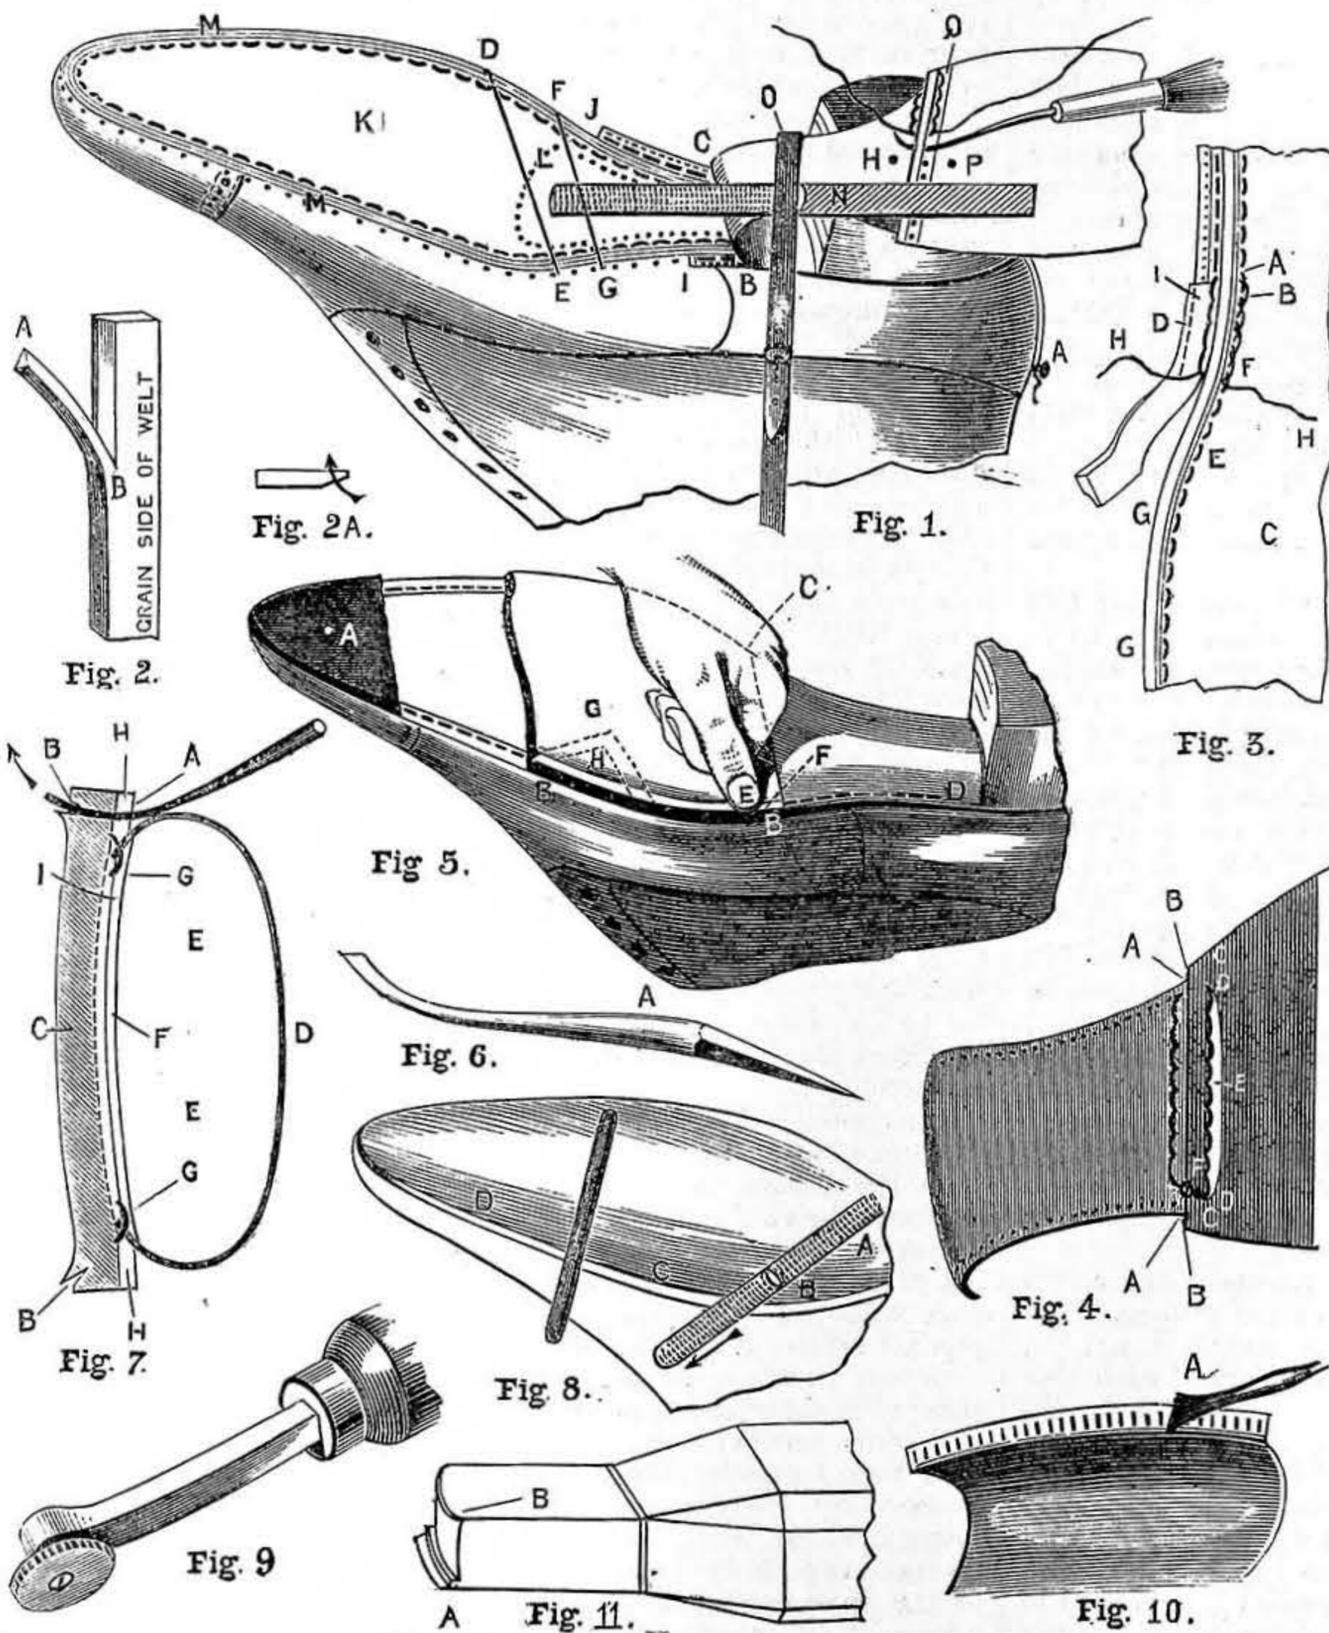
Boot showing Sole and Welt off and Waist turned back ready for Grafting, and Position to hold it while doing so. Fig. 2.—The Welt, with Piece nearly taken off to prepare for Sewing. Fig. 2 A.—Amount of Welt taken up in Sewing. Fig. 3.—Section of Boot, showing how to Sew Welt in. Fig. 4.—How to Sew Graft. Fig. 5.—Showing how to Fit, Stitch, Sew, etc. Fig. 6.—Blade of Stitching-awl. Fig. 7.—Transverse Section of Boot, showing Interior and Action of Awl in Stitching (A); B B, Channel; C, Sole; D, Upper Leathers; E E, Interior; F, Insole or Welt Stitch; H H, Welt; I, Bottom Filling. Fig. 8.—Showing how to rub down Channel. Fig. 9.—Fudge-wheel. Fig. 10.—Section of Boot, showing how to Stitch and Prick them up. Fig. 11.—Double Iron, showing Guards.
